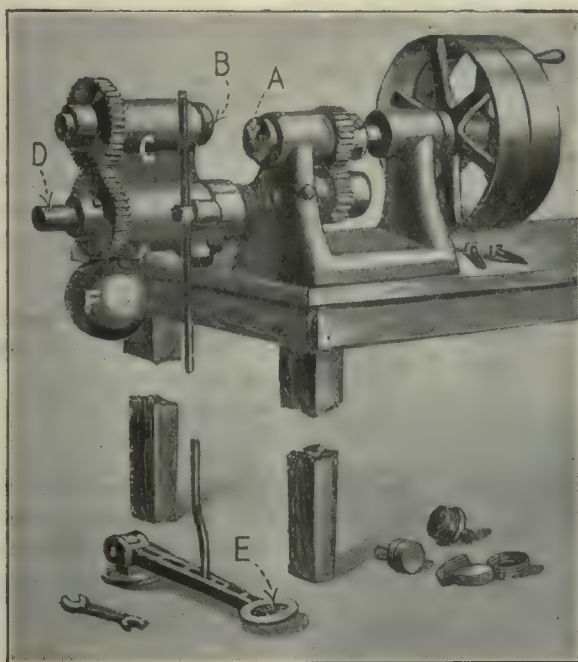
A THREAD-ROLLING MACHINE OF THIRTY YEARS AGO
